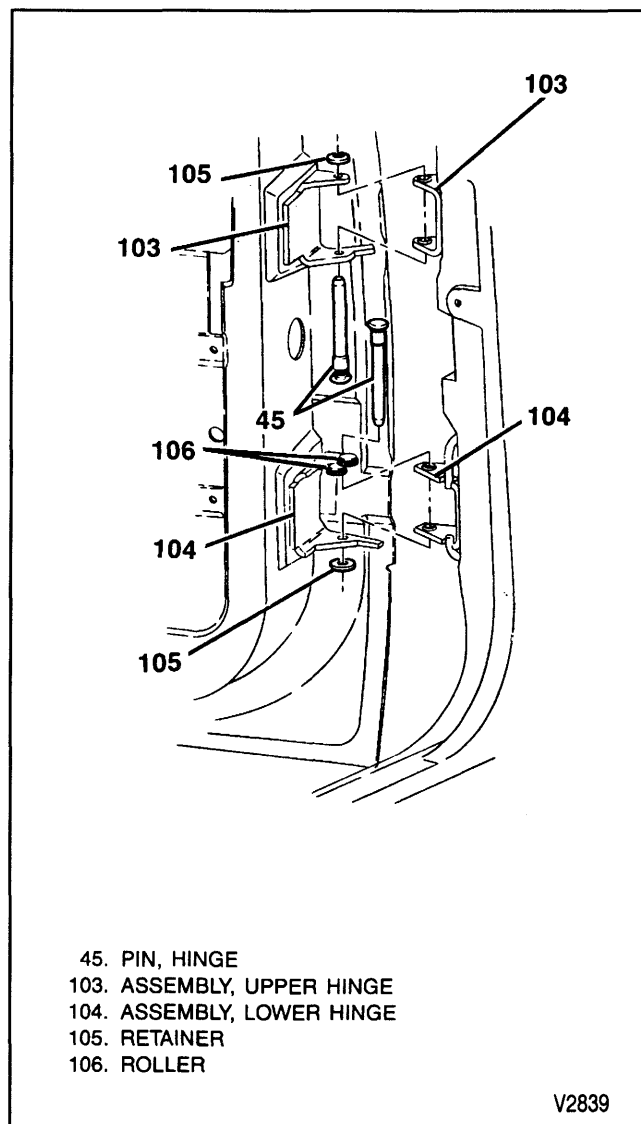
Rear Side Doors and Cargo Door Hinge Components
